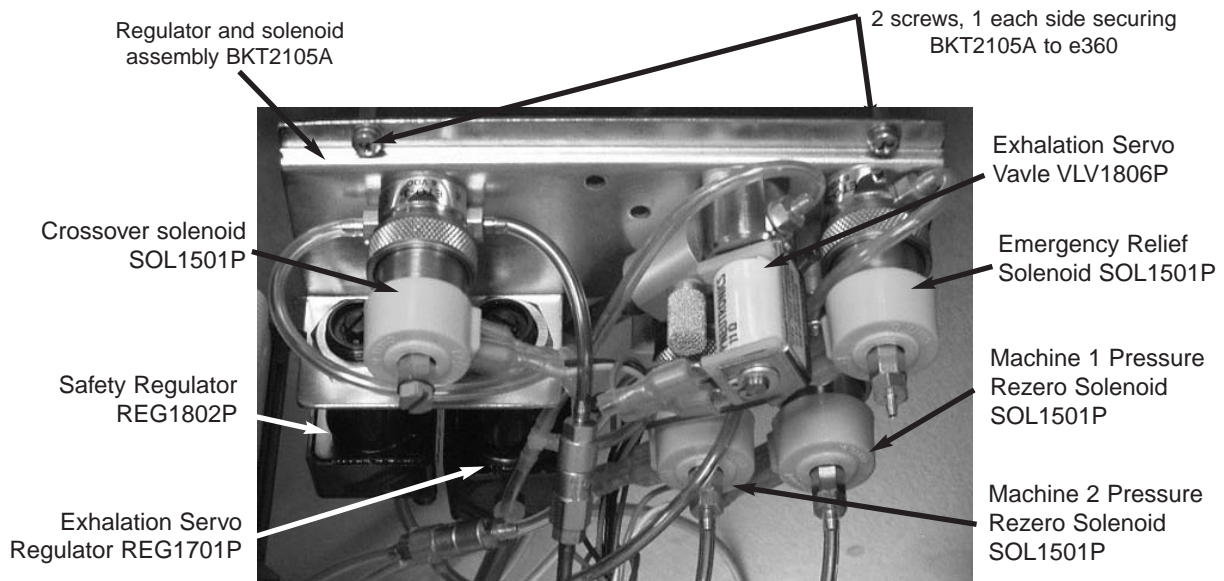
Regulator and Solenoid Assembly BKT2105A
